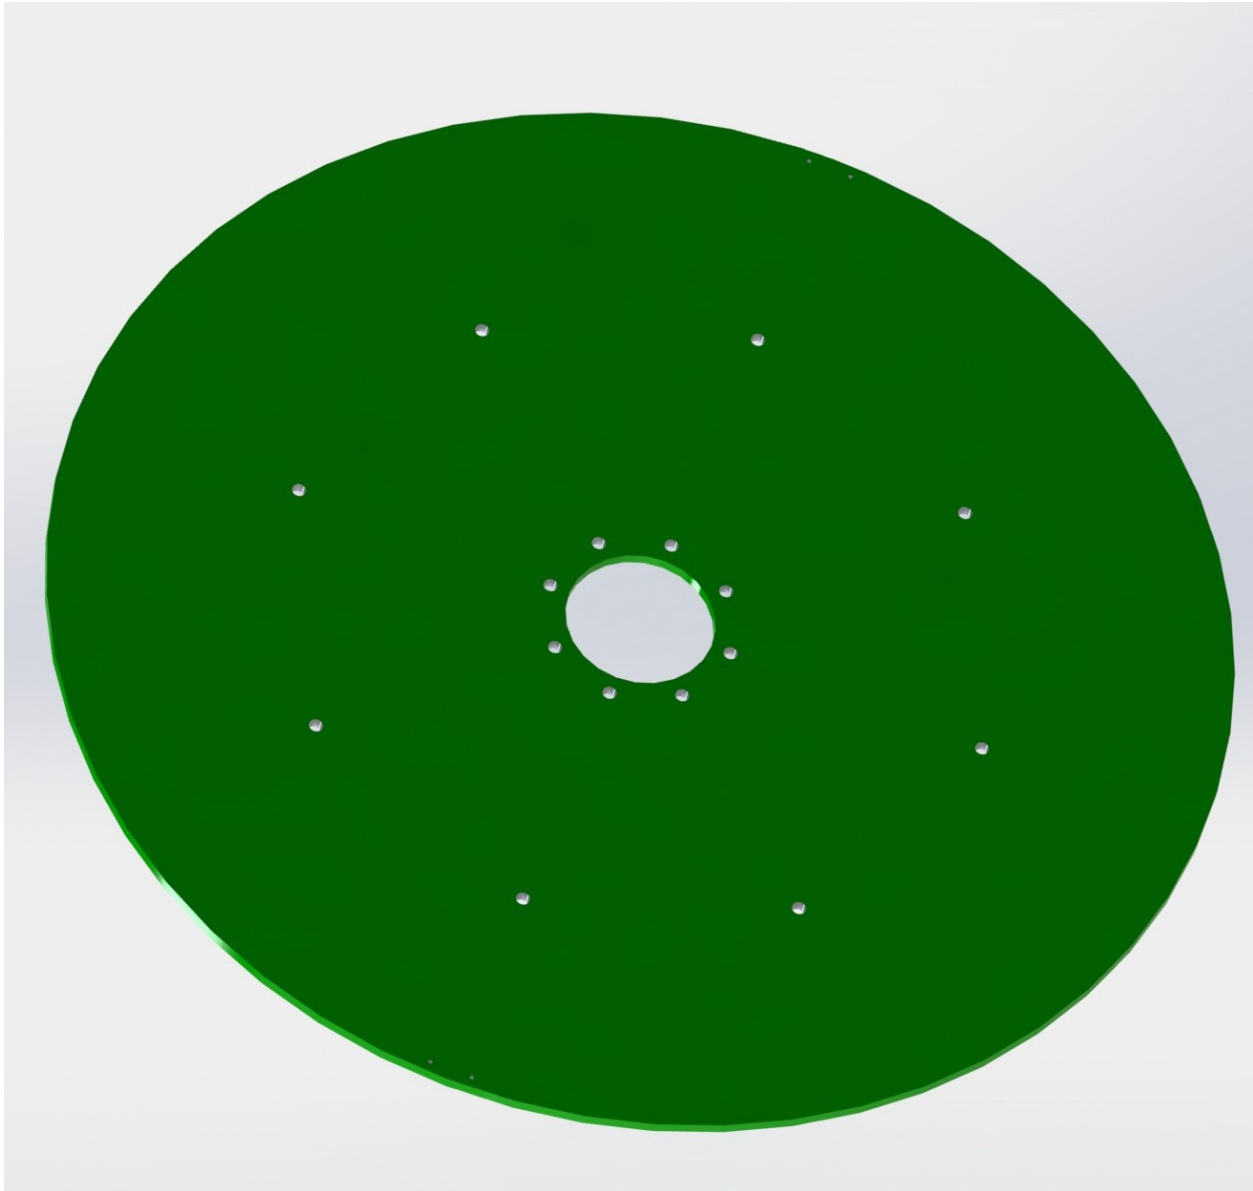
PCB rendering showing mounting holes to the primary copper disk
